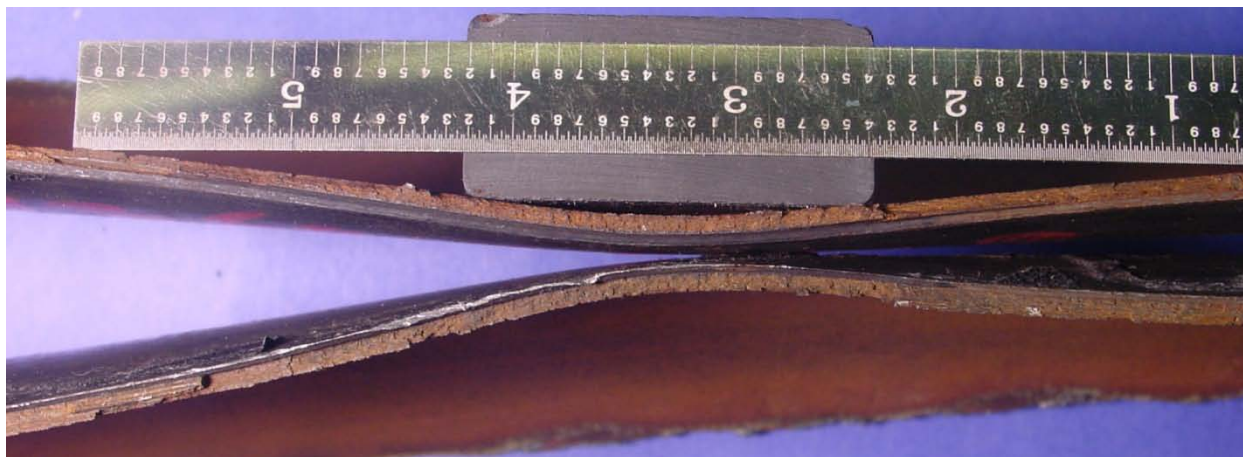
Fracture Surfaces of Fatigue Case Number 10 Anomaly
